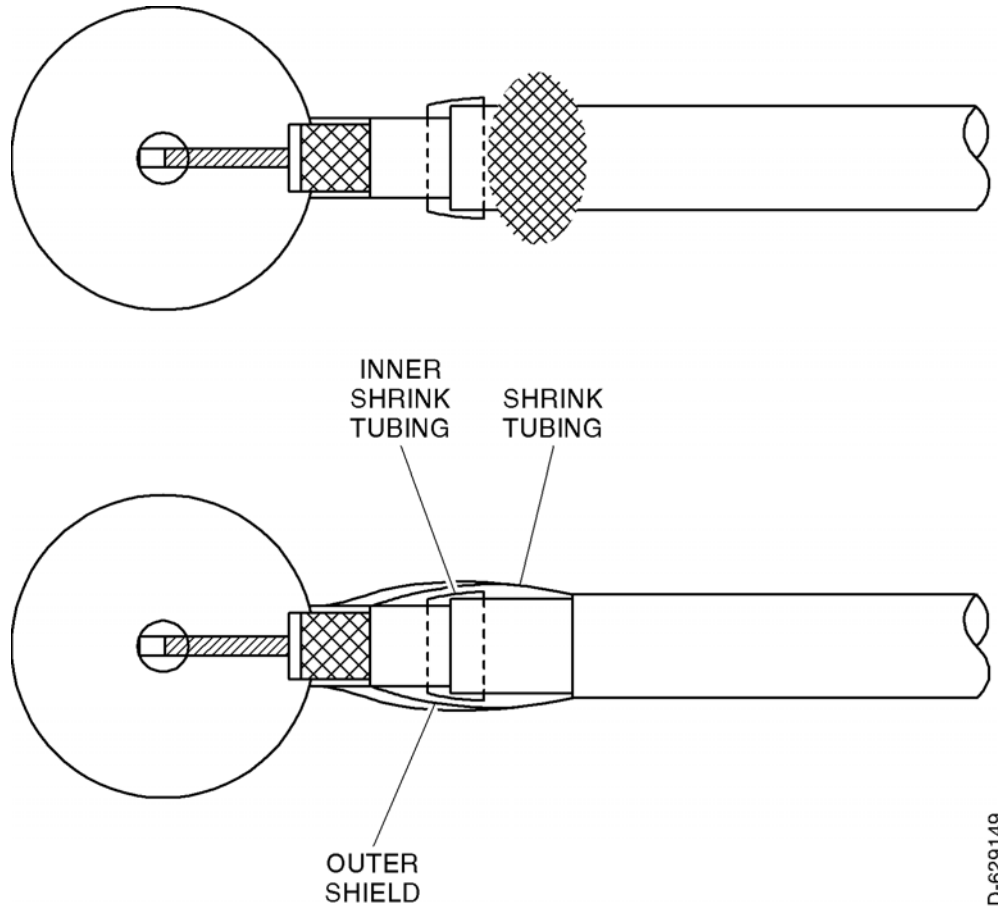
(Sheet 1 of 1) Quadaxial Cable Preparation
